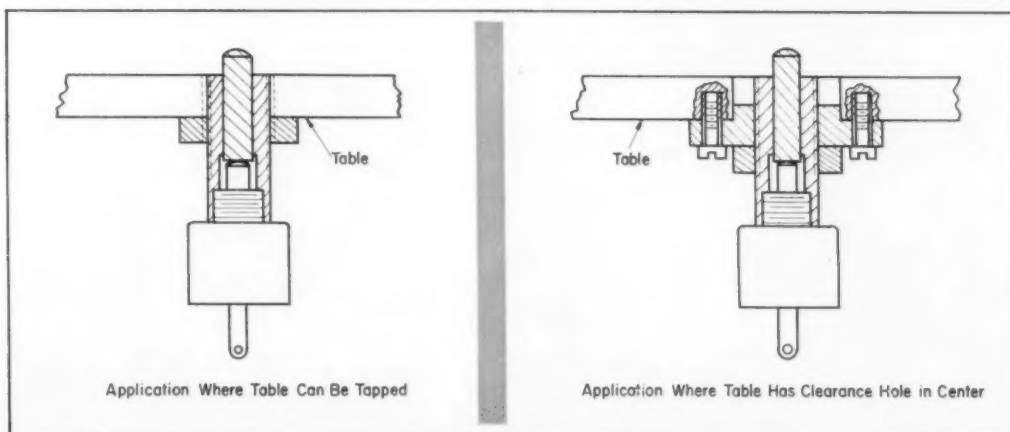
(below) Locating pin mounting arrangements for two types of tapping machine tables.
